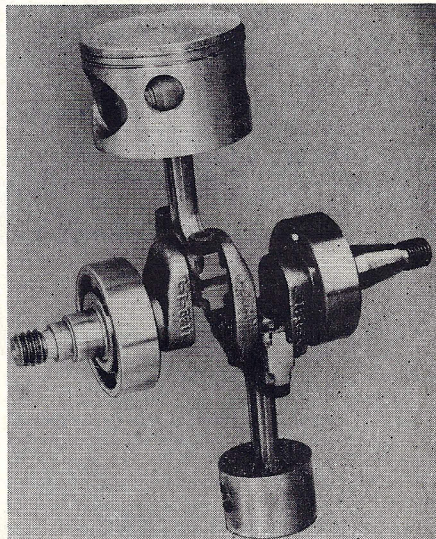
Piston, rod, crankshaft and bearing assembly removed from BP-1 chain saw engine.
